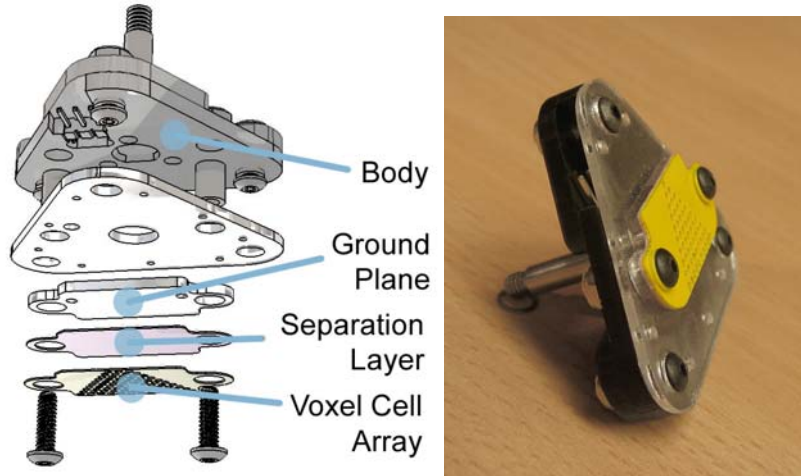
Exploded view of the electrostatic print head (left) and actual assembled view (right)
